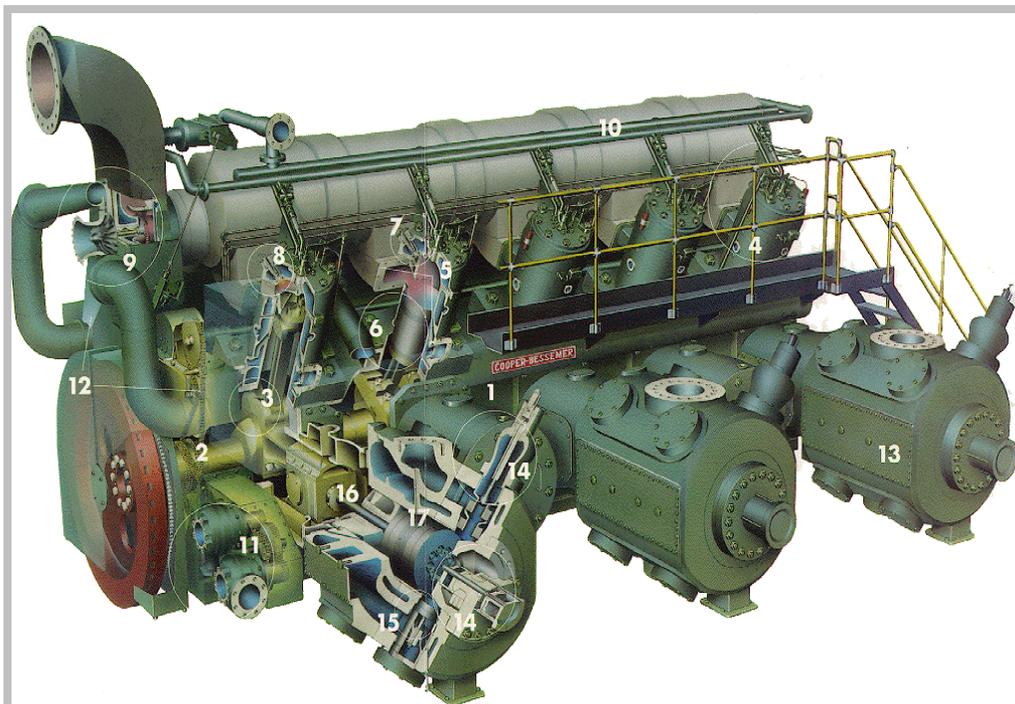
Cutaway view of a Cooper Bessemer integral reciprocating compressor.
